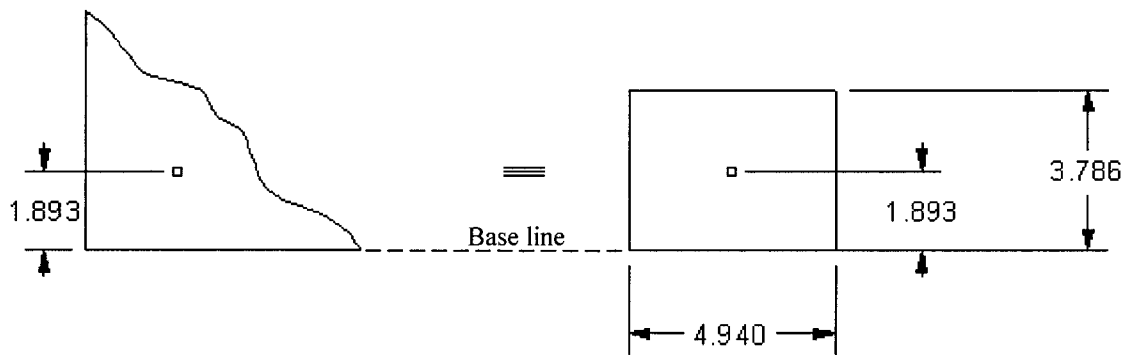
Transformation of cross section of weld to rectangular cross section
